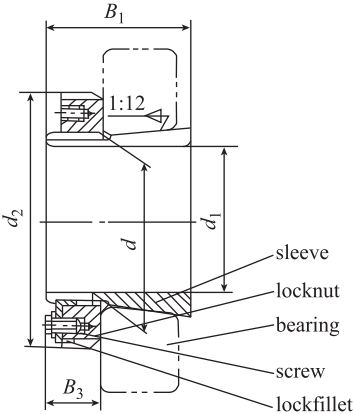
34 Installation dimension of the radial bearing with adapter sleeve (2)
